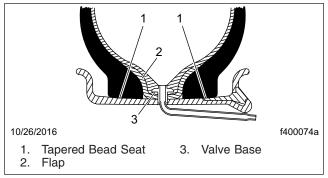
, Position of Beads, Flap, and Tube at 4 to 5 psi (28 to 35 kPa)
